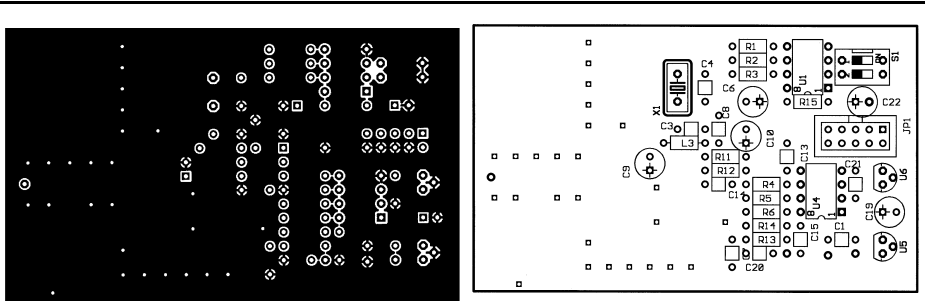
Top side of pcb for Microtx and normal insertion component layout.
